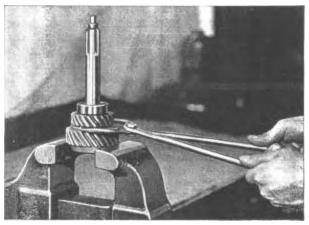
Removing Main Shaft Intermediate Gear Retainer—J-449 Lock Ring Retainer
